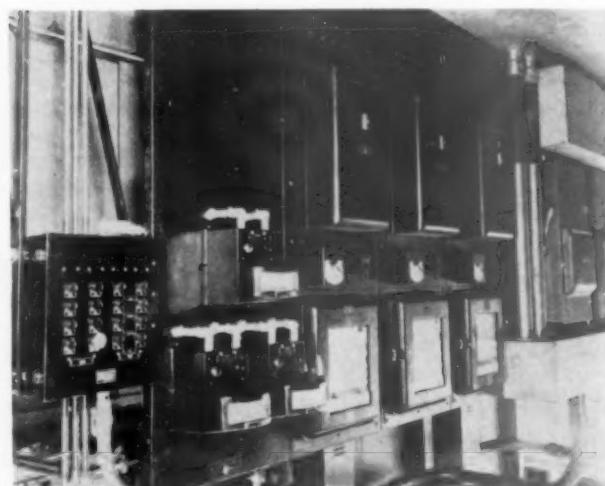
Control panel of Roller-Hearth Electric Furnace. Oblique front view (from right) showing push-buttons for operating conveyor (extreme right) and also various push-buttons for independently operating furnace and quench doors and quench valves.
